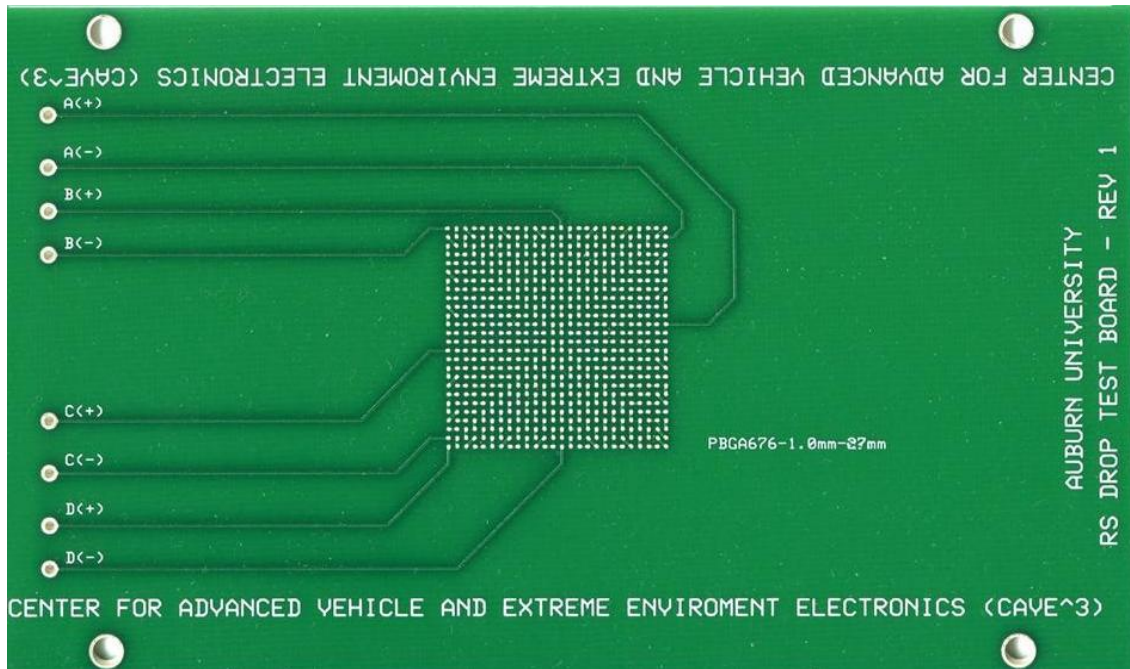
Actual PCB with PBGA 676 Footprint Accommodating 4 Daisy Chain Patterns
